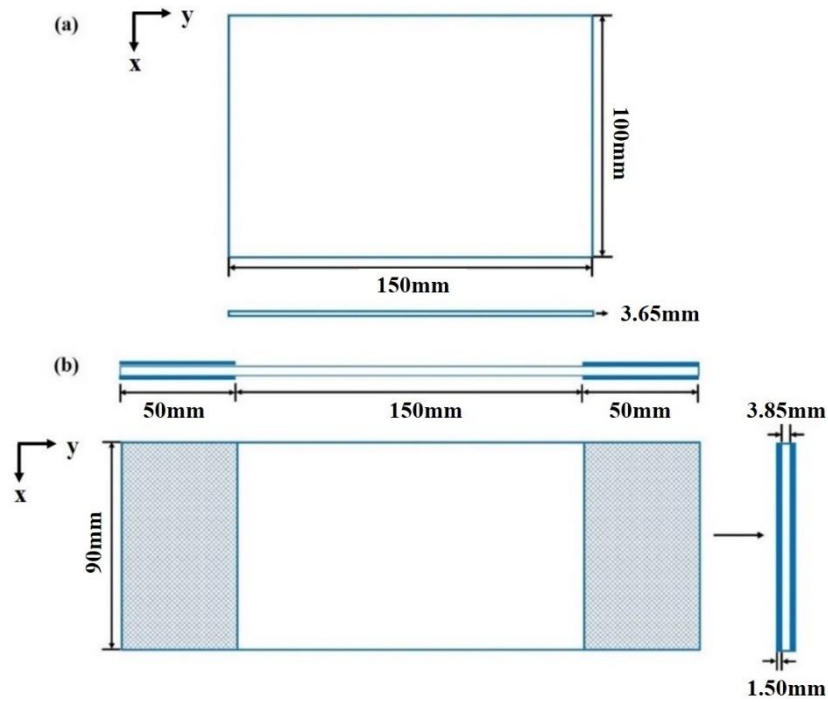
Dimensions of specimens: (a) compression and CAI test specimens; (b) fatigue and post-impact fatigue test specimens
